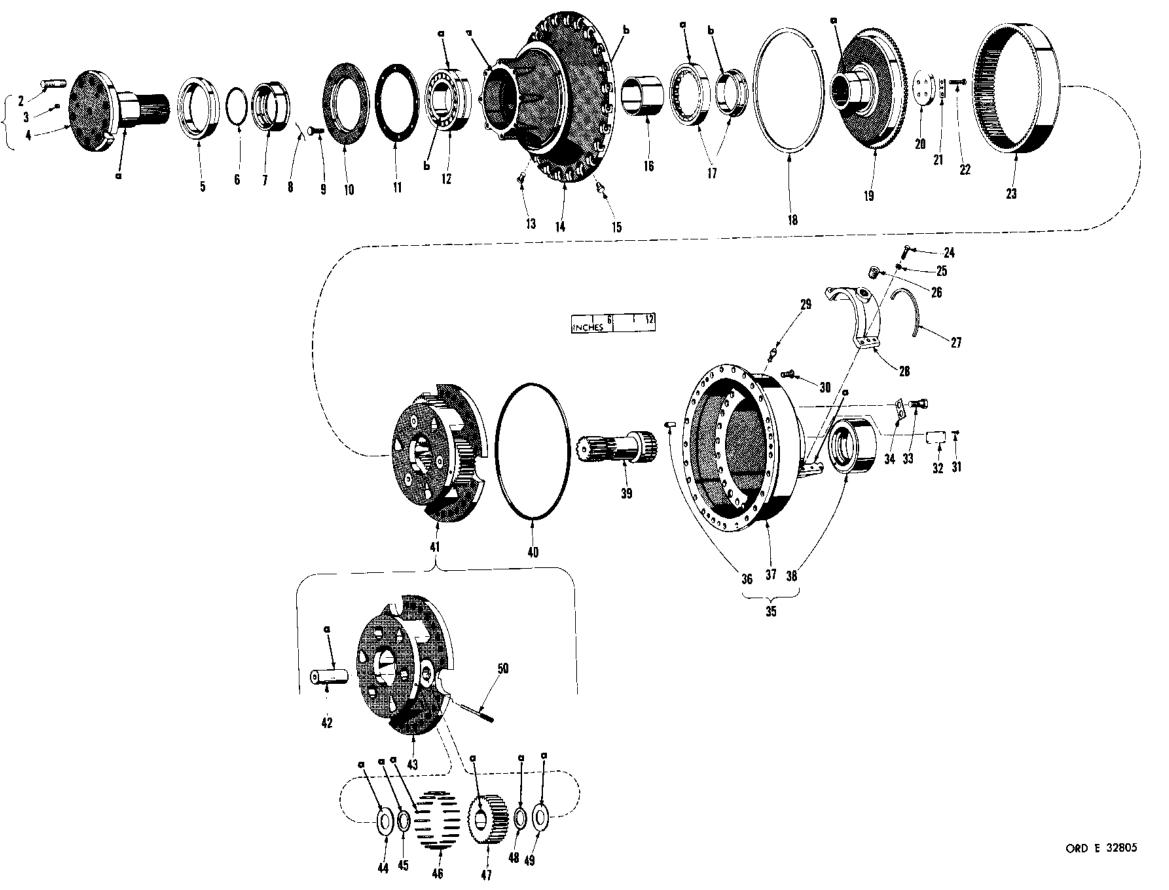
Fold-out 15 — Right-output drive assembly — exploded view
